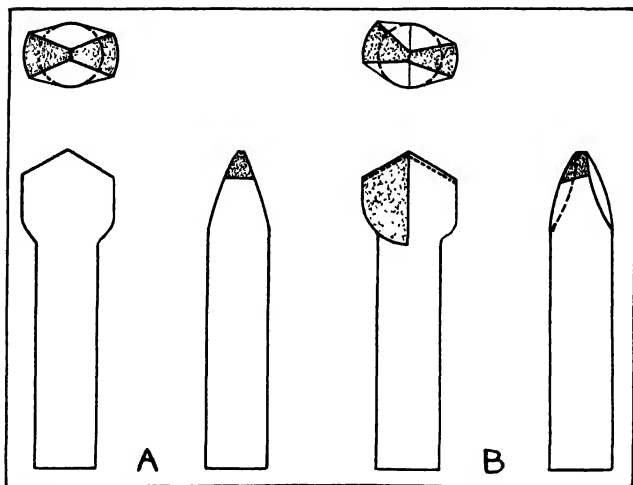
Progressive Steps in Forging a Special Drill for Taking Manganese Steel Test Samples
